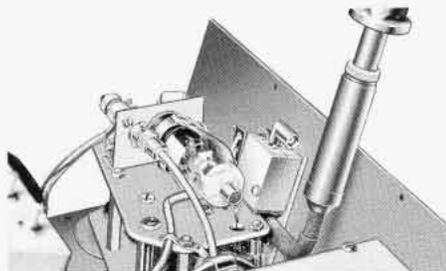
Using a right-angle soldering iron to solder the thermocouple connecting strap in place
